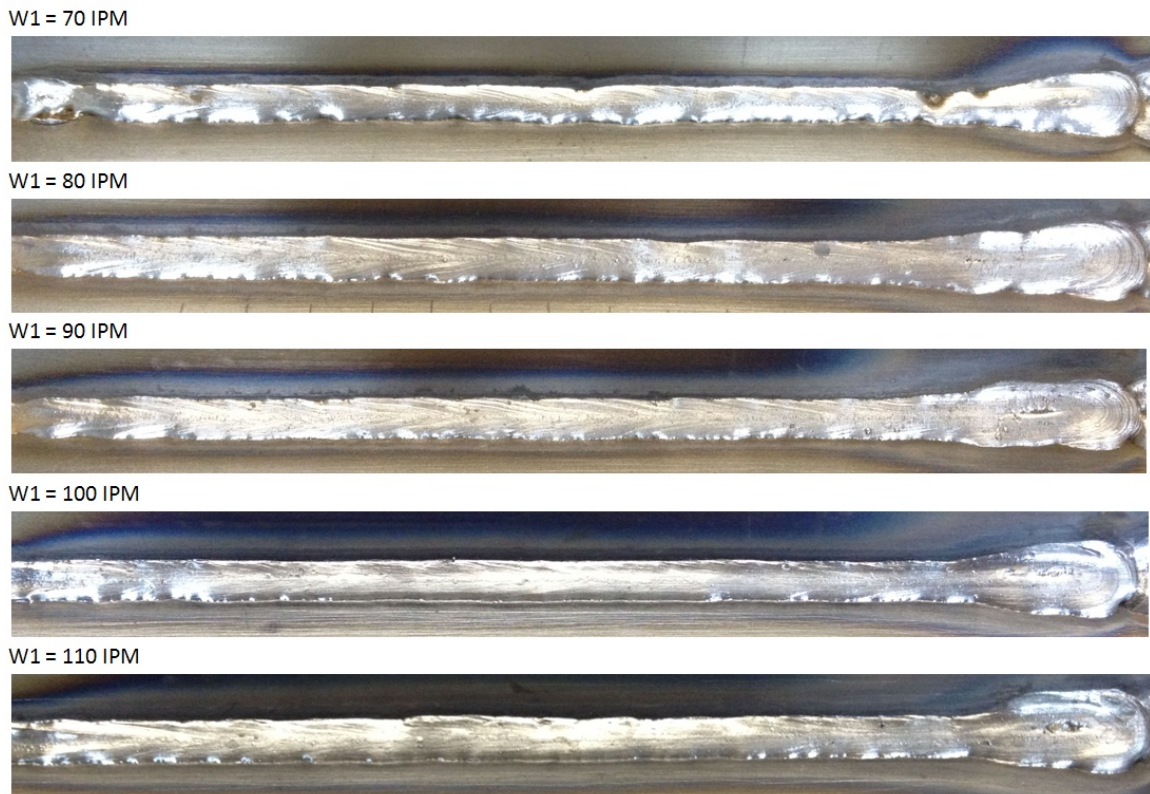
Weld Beads in Heat Input Experiments
